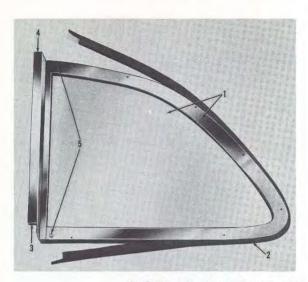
Rear Quarter Window Frame and Glass Assembly, Retainer, and Fastening Screws.
